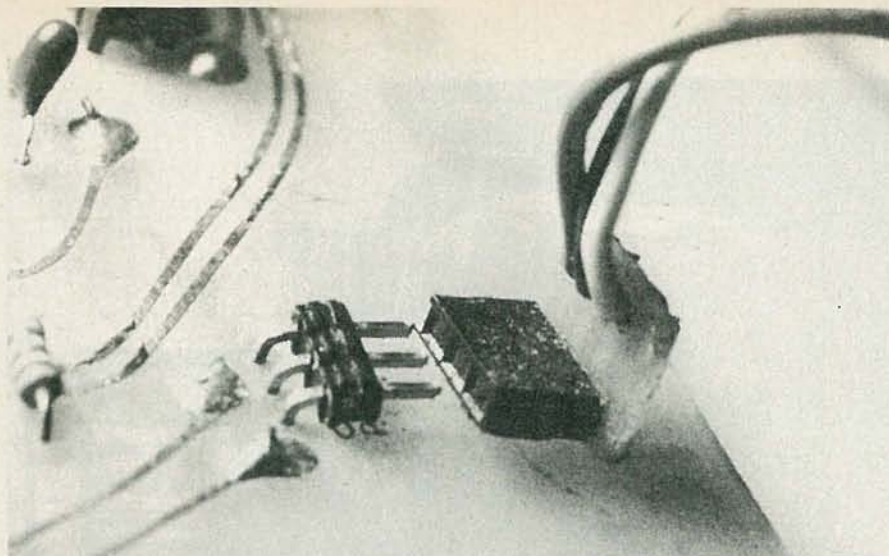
A SHORT HEADER STRIP is shown here. This is one of the power interconnections.
